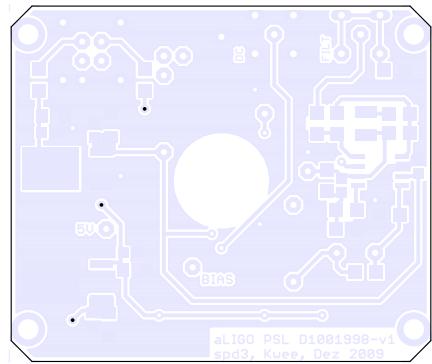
Board bottom view showing drills with 0.5 mm (0.020 in) diameter
